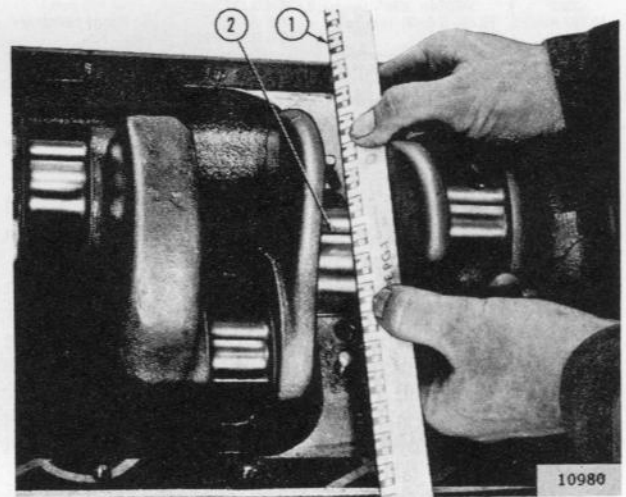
CHECKING MAIN BEARING CLEARANCE WITH PLASTIGAGE
